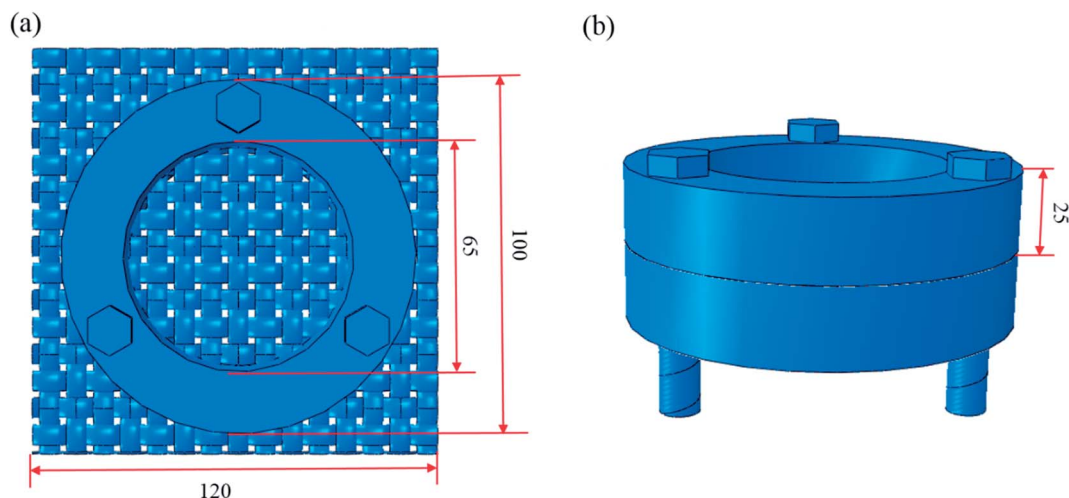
Geometric dimensions of the clamber and fabric in the semi-blunt puncture test. (a) Steel ring and fabric; (b) side view of the steel ring.
